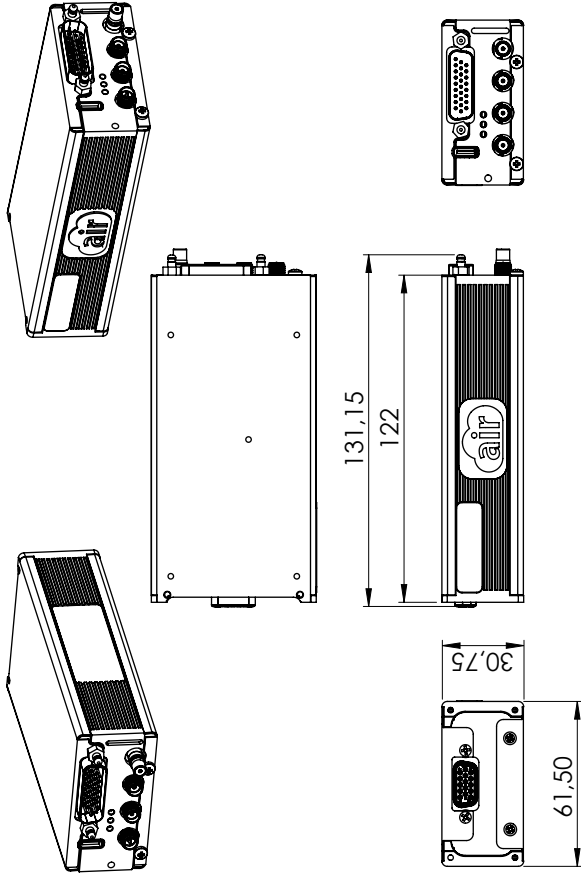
Dimensional drawing, all dimensions in millimeters
